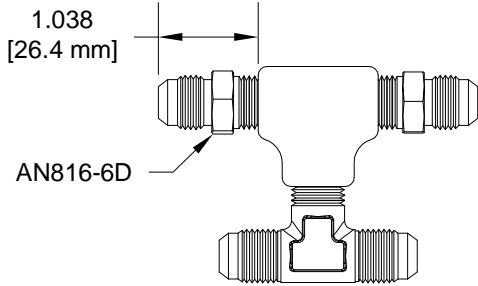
BYPASS FITTING ASSEMBLY DIMENSIONS
